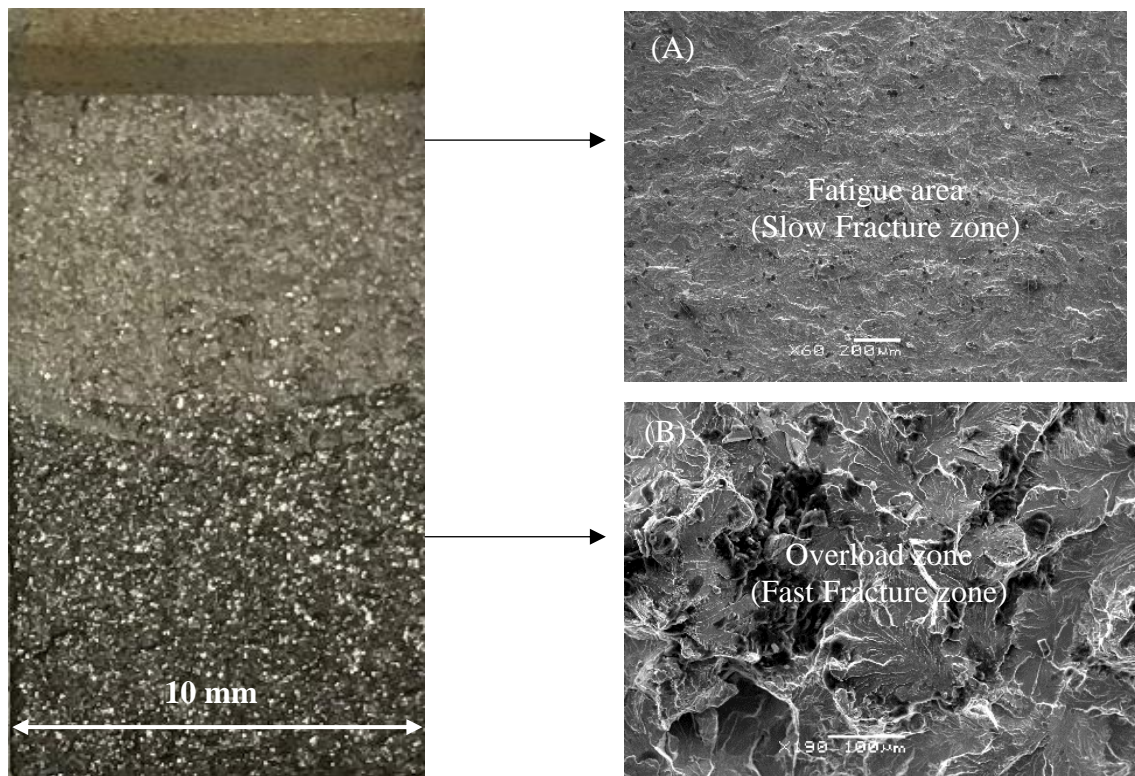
Macroscopic view of a fractured surface showing the morphologies of the fatigue crack growth area (A) and the brittle fracture area (B) to show that the fatigue zone is smoother than the overload zone, a lighter shade of grey may be used.
